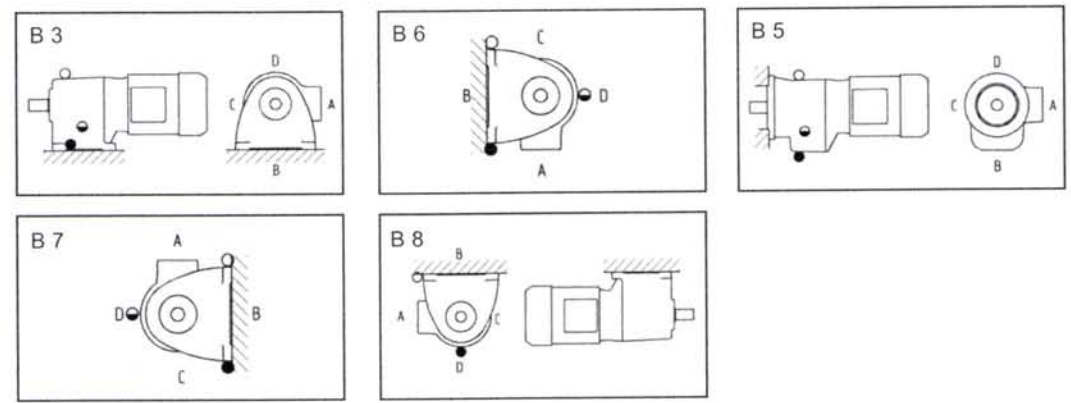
Constructions spur gear motors with horizontal shaft arrangement
